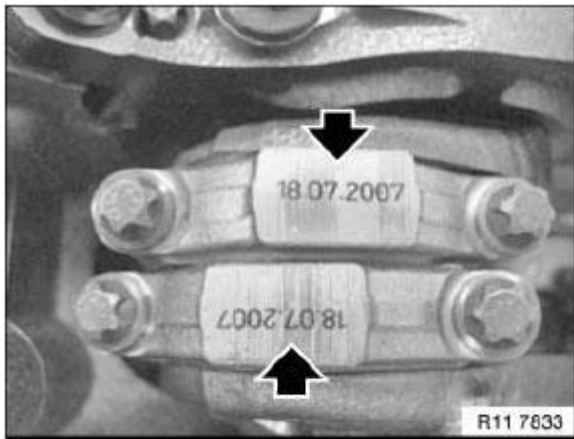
Identifying Stamped Dates On Connecting Rod Bearing Caps
